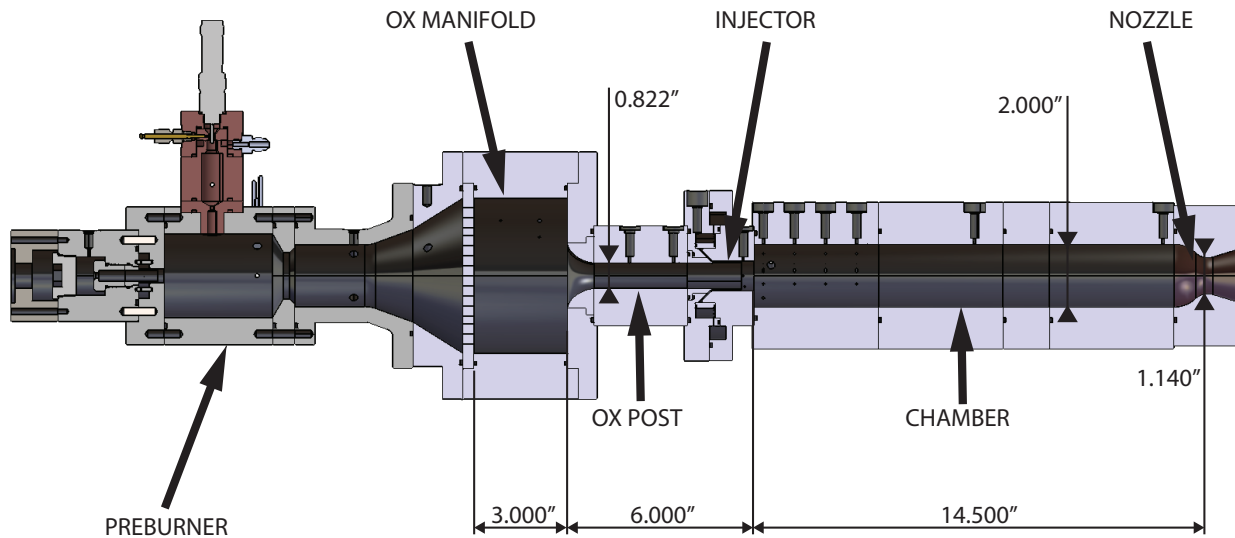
Experimental setup of HAMSTER, a single shear coaxial injector element model rocket combustor.
